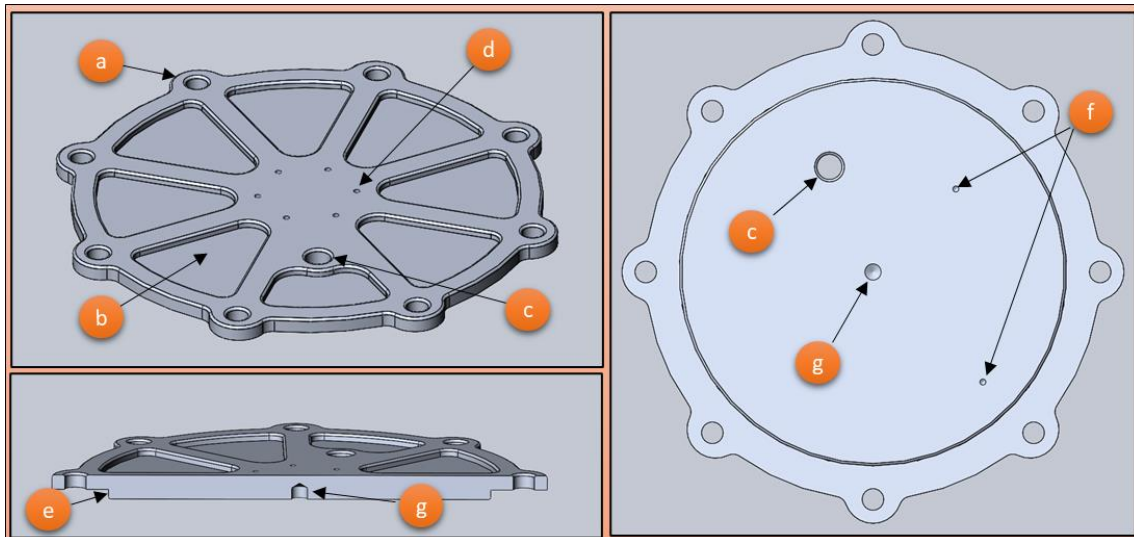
WCH lid final design; a: 8× flange (M8 clearance hole), b: 8× undercuts, c: penetrator hole, d: exterior connection (6×M6 tapped holes), e: bottom boss, f: MOSFET connection (2× M3 tapped holes), g: pillar connection (M8 tapped hole)
